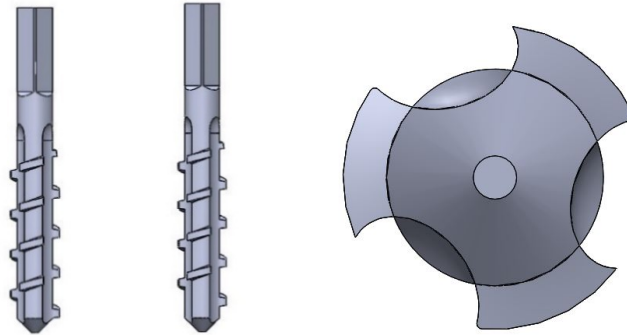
CAD models of the final designs of the threaded pins. One with a steering part and one without. The picture shows the CAD models from the side and from the bottom.
